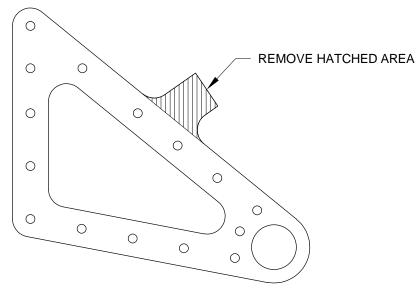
HINGE BRACKET SPACER TRIM FOR OUTBOARD AILERON HINGE BRACKET ASSEMBLIES
